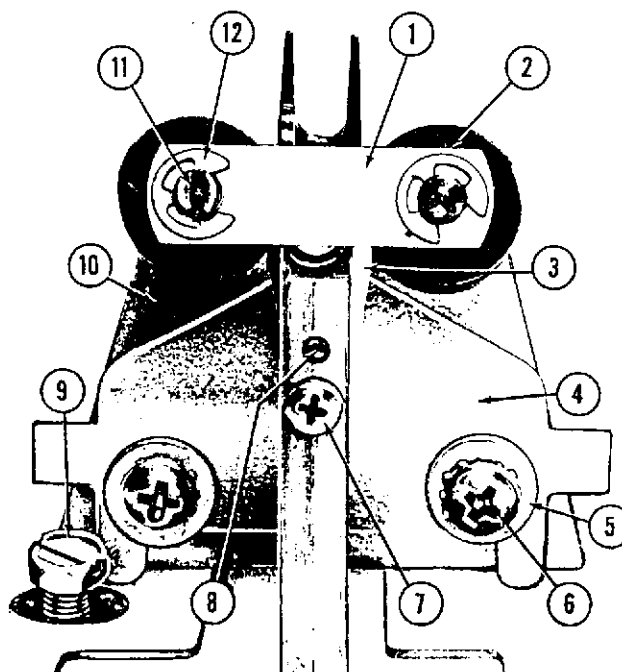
BRACKET AND ROLLER ASSEMBLY, LIFT ARM GUIDE
